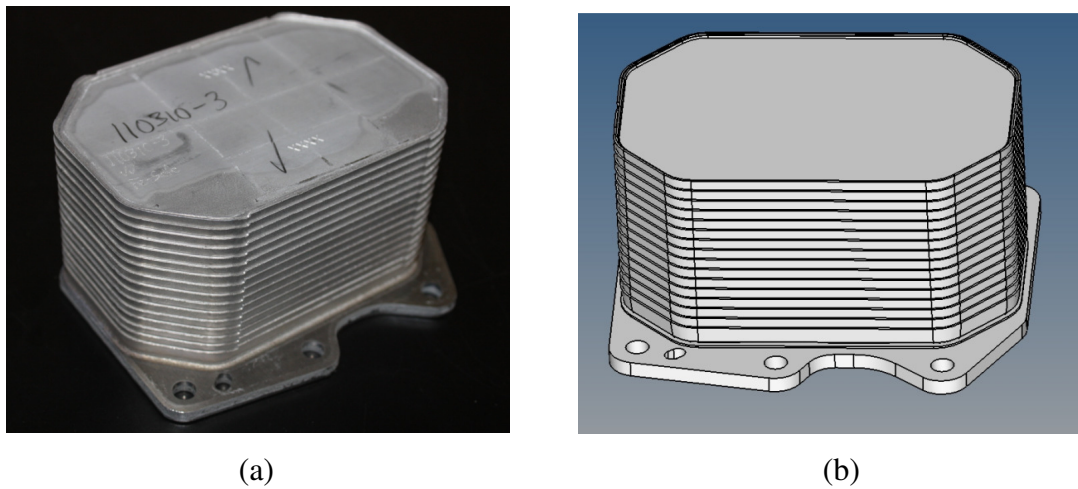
(a) The cooler prototype and (b) the CAD model of the cooler assembly.
